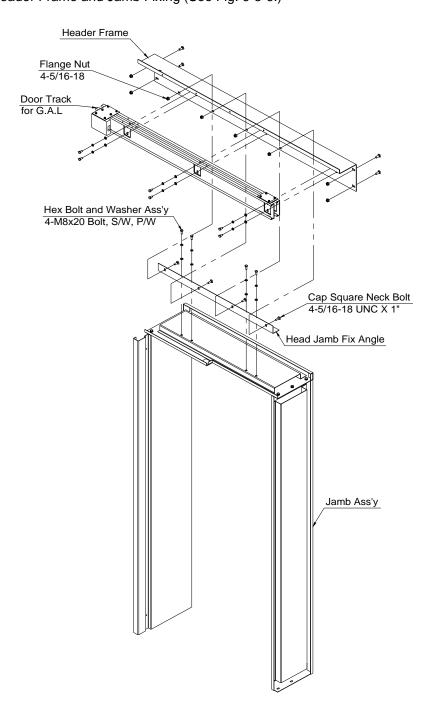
HEADER FRAME AND JAMB FIXING (TWO SPEED)
